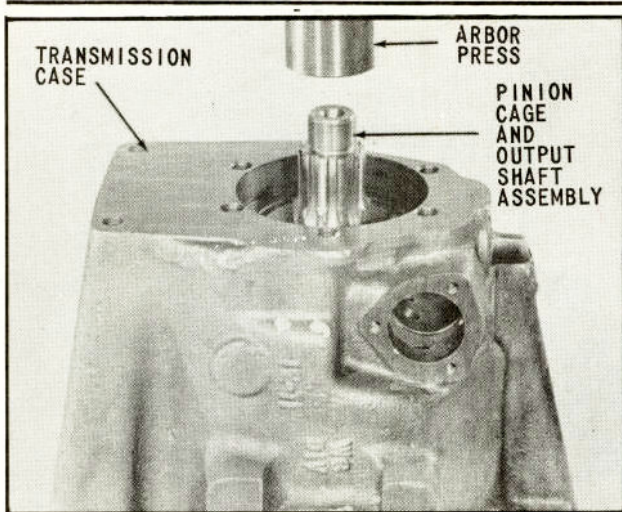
Case Assembled over Pinion Cage and Output Shaft Assembly and Assembly Tool
